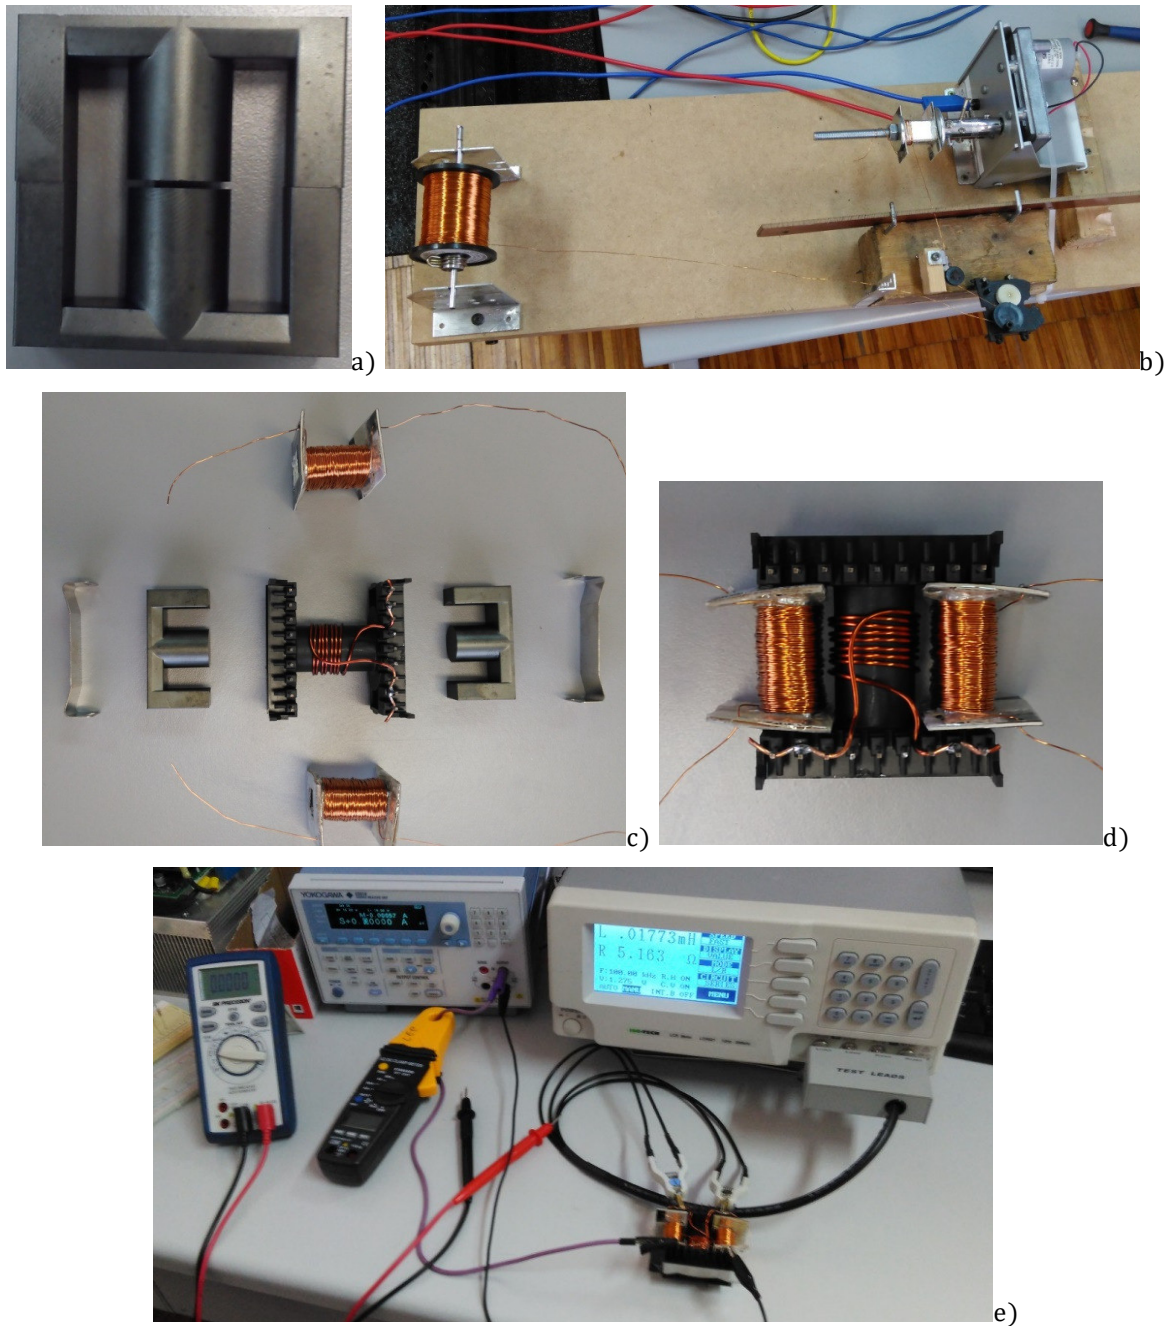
VI parts, assembly and tests: a) ETD 44/22/15 ferrite core; b) Coiling machine; c) VI parts; d) VI full assembly; e) Tests of the VI
